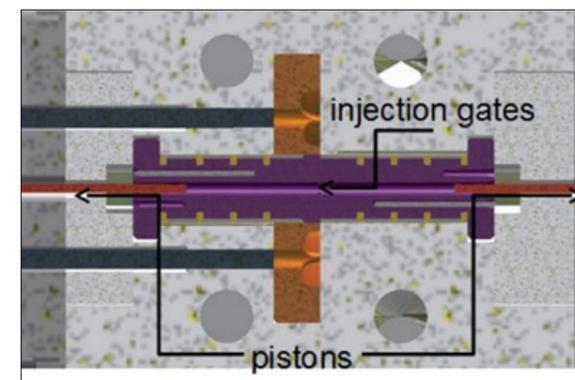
Experimental mould for cylindrical samples with movable pistons [9] (Courtesy EPMA)
